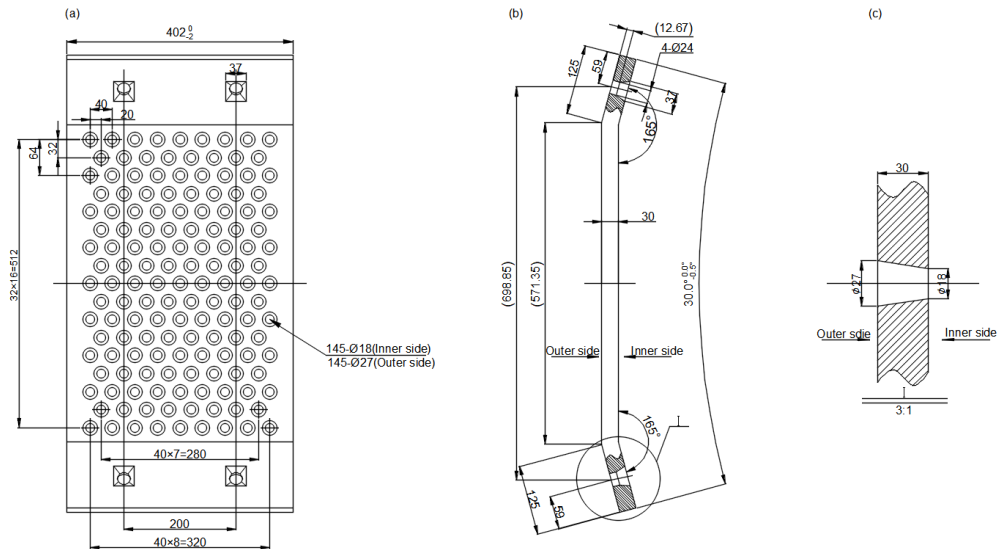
Schematic diagram of the porous liner structure: (a) Front view, (b) Left view, (c) Sectional view of the sieve hole
